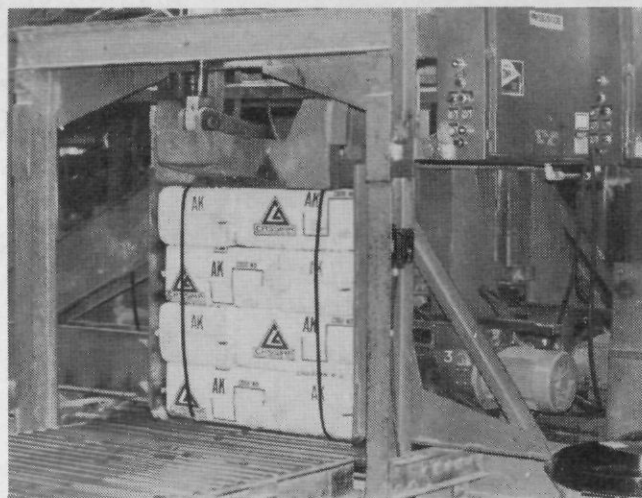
Strapping machine with a one-ton unit of cement (AK) fibre.
